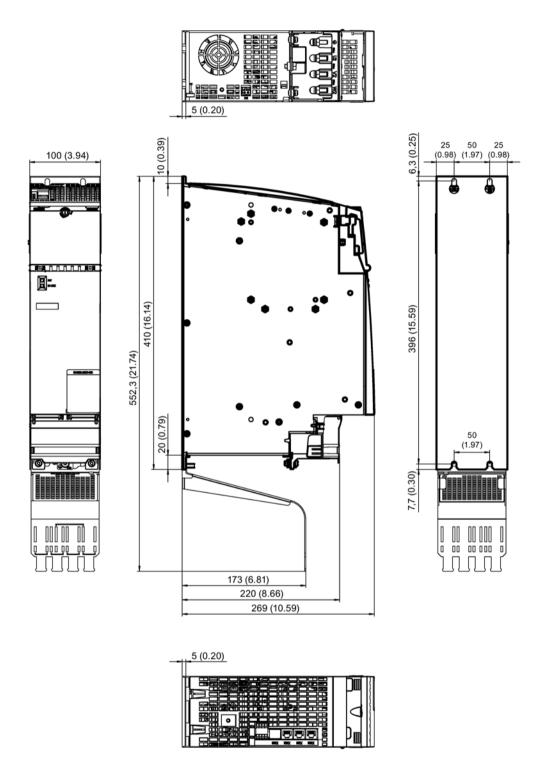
Dimension drawing of 100 mm Motor Modules 45 A / 60 A in Booksize format C type with internal air cooling, all dimensions in mm and (inches)
